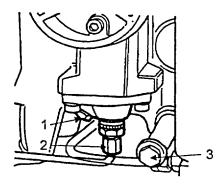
COMPRESSOR OIL PUMP AND DRAIN PLUG
